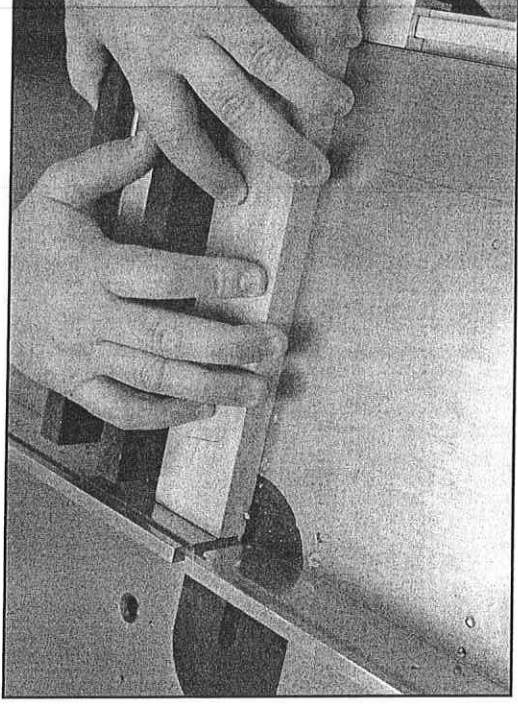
Cut the dado in the side first. This will allow you to make minor adjustments for material thickness.
